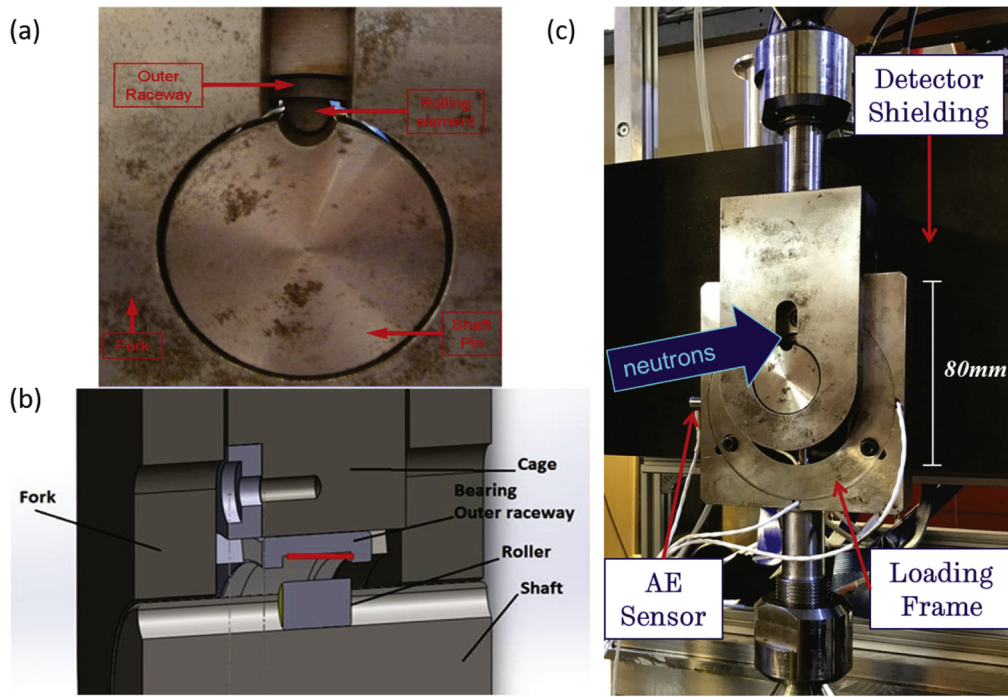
(a) Roller bearing and FLRF assembly. (b) CAD cross-section of the assembled FLRF visualising contact site (red line). (c) Experimental setup on ENGIN-X instrument, with MCP detector. (For interpretation of the references to color in this figure legend, the reader is referred to the web version of this article.)
